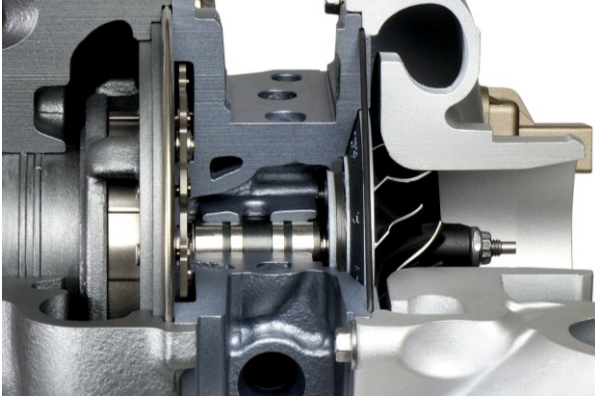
BALL BEARING ROTOR-BEARING SYSTEM
